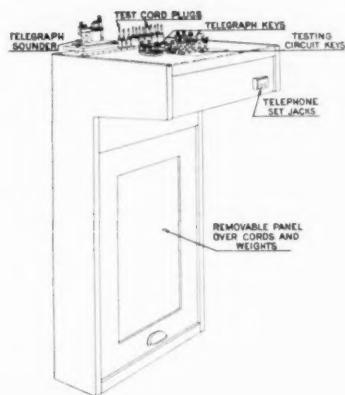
Typical Assembly for Keyshelf Equipment Unit for Panel Mounted Test Board
